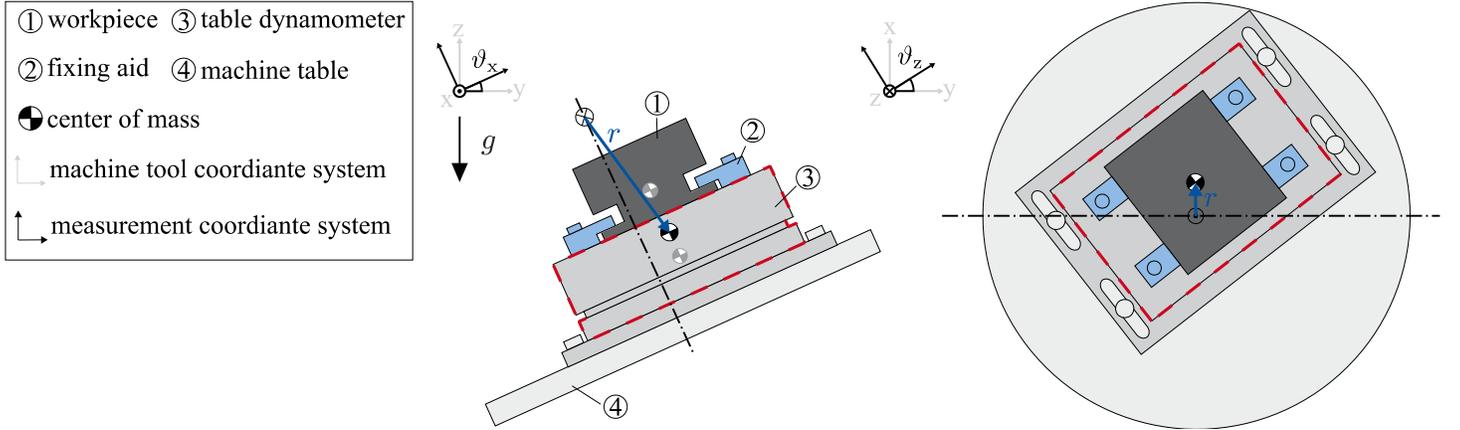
Setup of machine table, table dynamometer, fixing aid and workpiece in multi-axis milling
